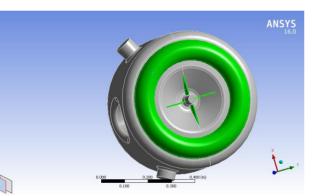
Stiffeners on cavity end wall (highlighted green colour).
